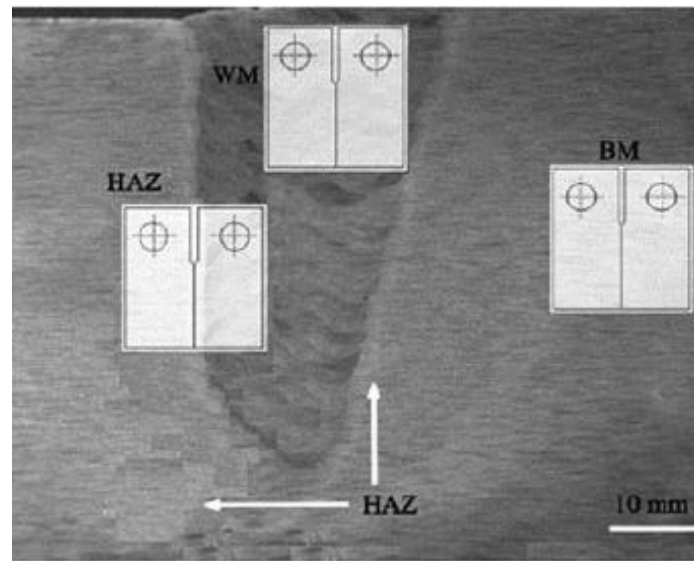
Compact tension specimens extracting from P91 steel welded joint. WM, BM and HAZ [5].
